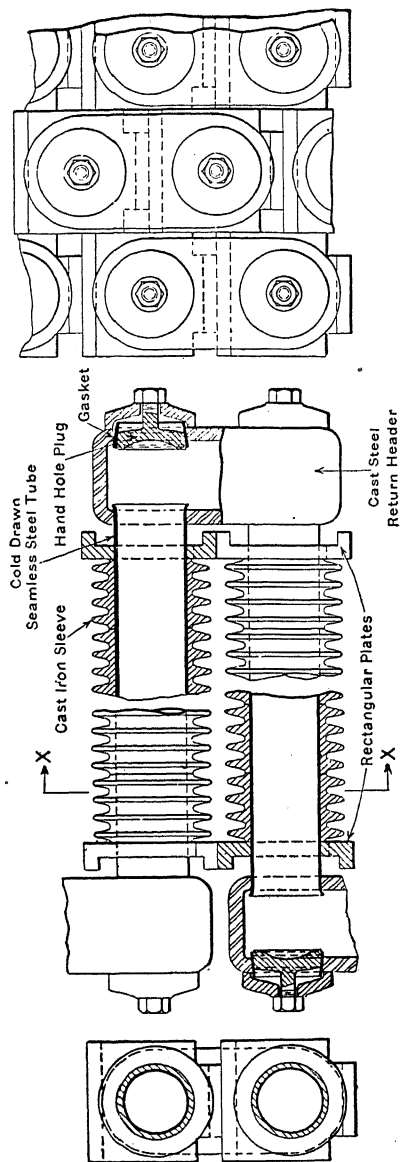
Construction of Foster Heating Surface Showing Details of Tubes, Headers and Plates.
